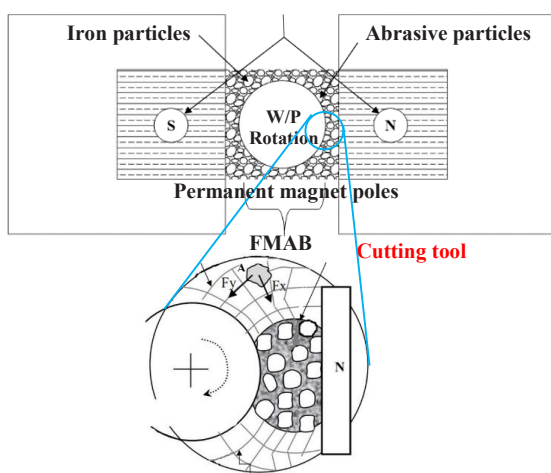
Schematic illustration of the Magnetic Abrasive Finishing (MAF) process for finishing external surfaces of cylindrical parts.
